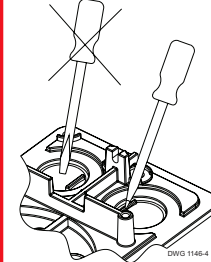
Switch Terminal Connections Clamping Plate Terminal
